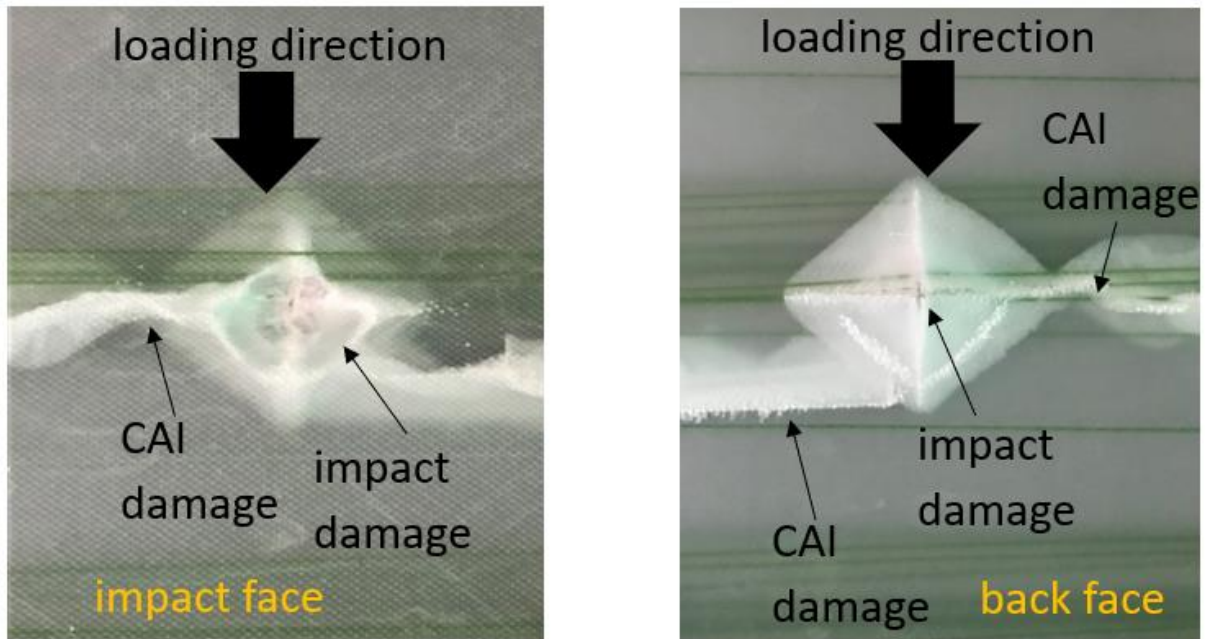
CAI damage of S2 glass / epoxy specimen for 15-40J
